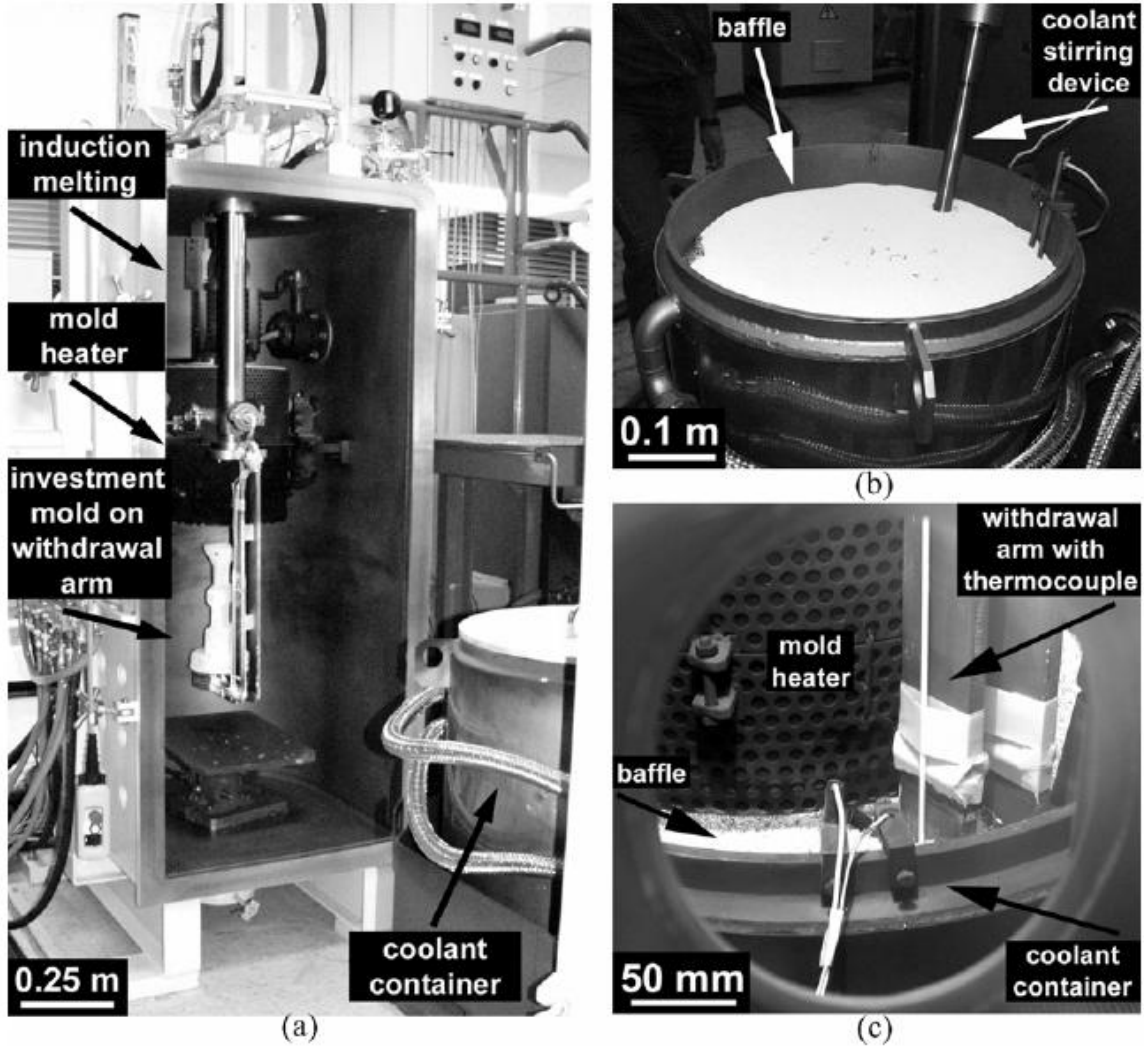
(a) Image of casting furnace with mold seated on chill plate, (b) image of coolant container depicting floating baffle and coolant stirring device, and (c) image of the coolant container positioned below the mold heater during solidification [1].
